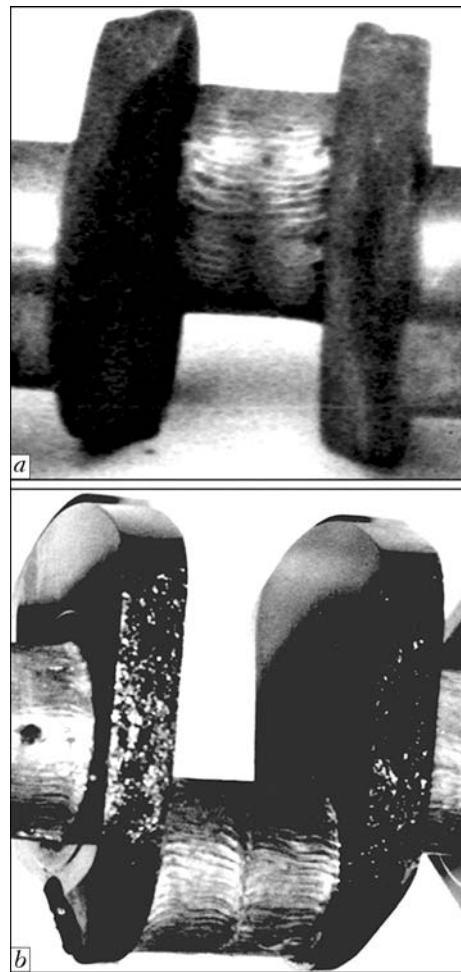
Appearance of crankshaft journals after wide-layer hard-facing using self-shielding flux-cored wire PP-Np-30Kh4G2SM under optimal conditions with one layer (*a*) and two adjacent layers (*b*)
